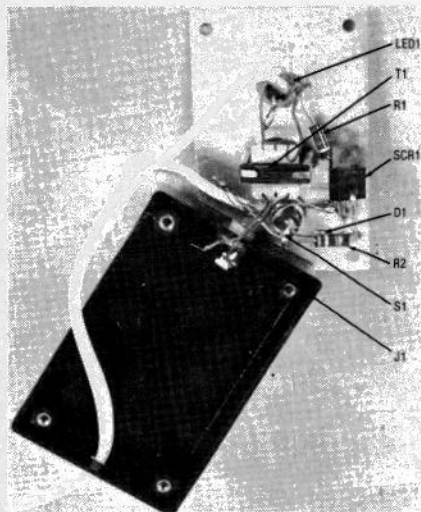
LAYOUT shows how all the components fit easily into a 3 × 2 × 1-inch enclosure.
